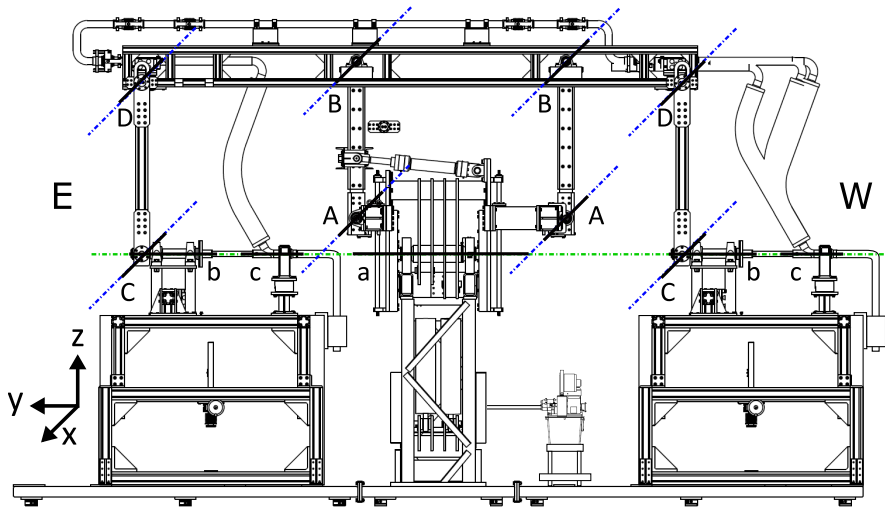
REPA rotation and translation axes. Rotation: a) drive pylon , b) swivel drives, c) swivel joints. Translation: A) drive pylon arm bearings, B) drive pylon arm connections, C) and D) - swivel drive arm bearing and traverse connections
